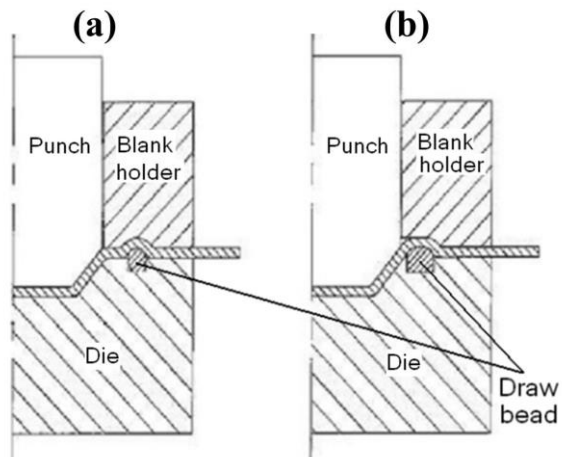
Schematic design of (a) intermediate bead and (b) edge bead [29] in the deep drawing process.
